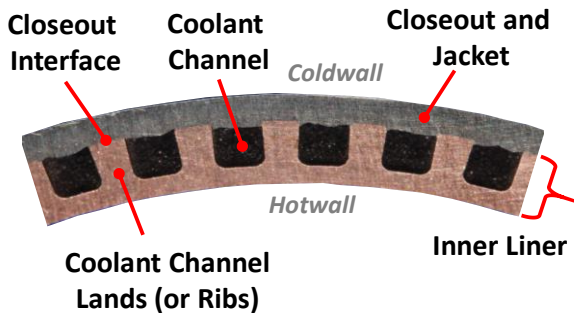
Channel Wall Nozzle Configuration (Bimetallic liner shown).
